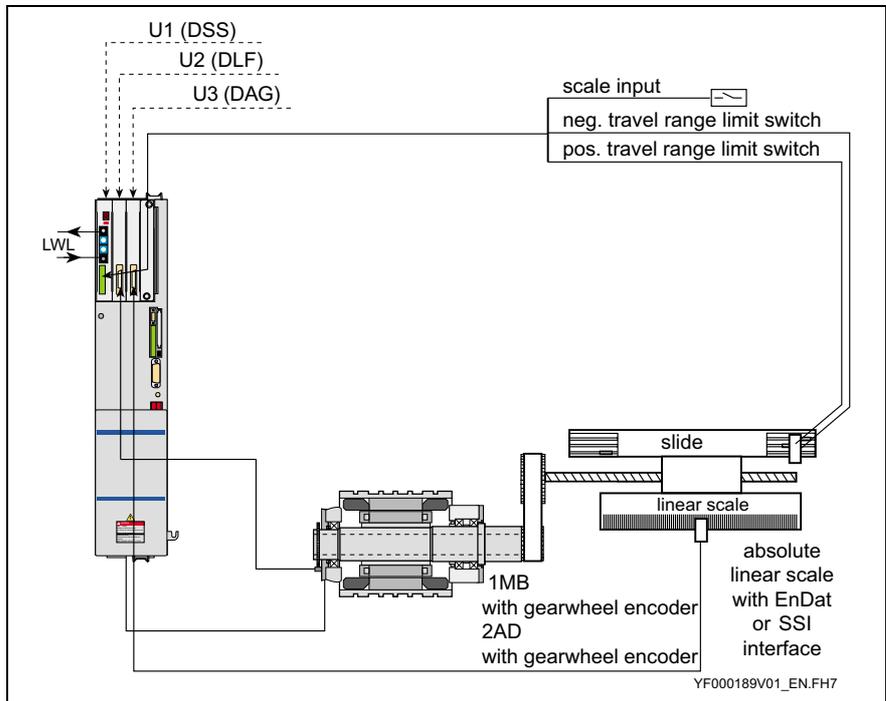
Drive with 1MB or 2AD motor with gearwheel encoder with direct absolute position detection (DiAx 04)
